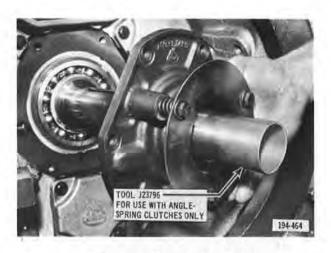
Installing Main Driving Pinion Bearing Cover Assembly
